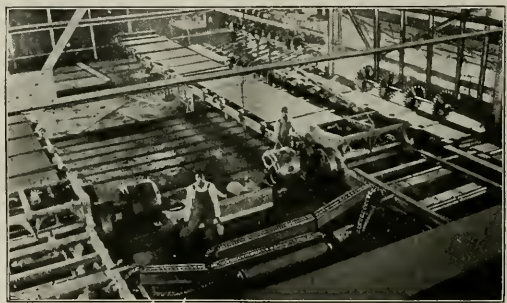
INTERIOR OF SAWMILL SHOWING TWO DIRECT-CONNECTED MOTOR-DRIVEN EDGERS
